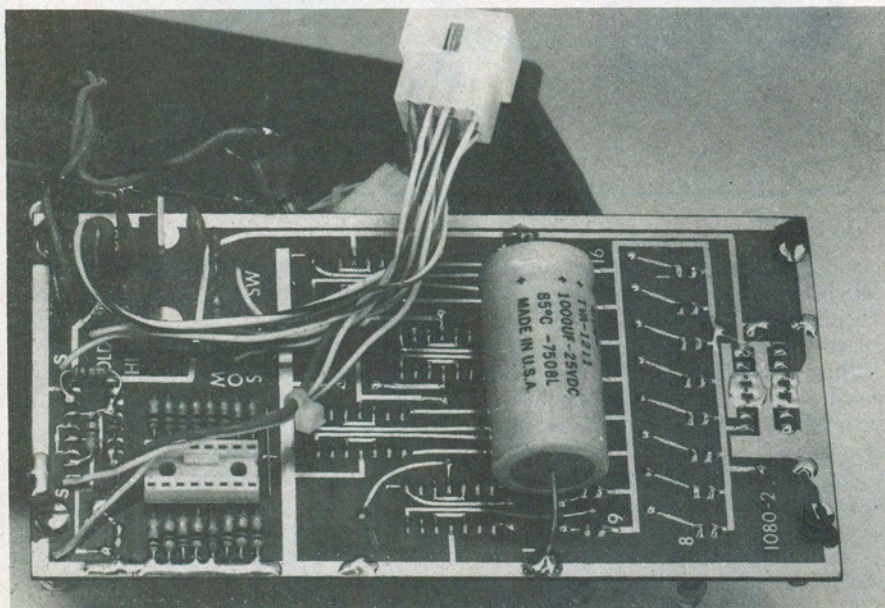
"FOIL-SIDE" of display board. Multi-wire assembly connects to components on panel board.
